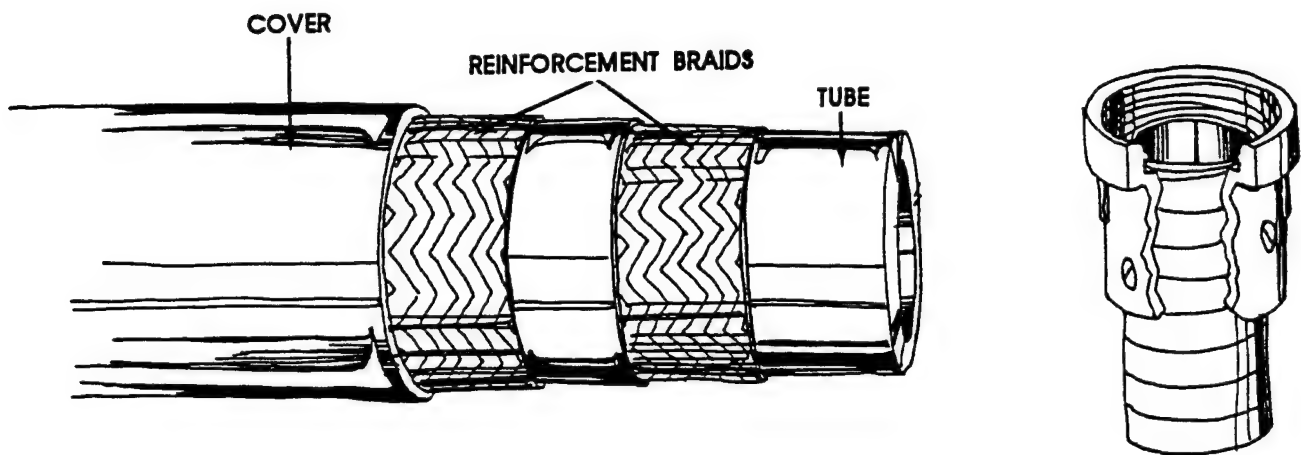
Dry-Mix Shotcrete Placement Hose Construction.
